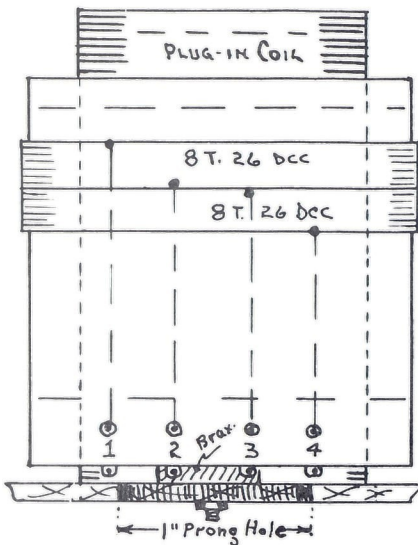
Full size detailed layout showing plug-in coil thru center.
